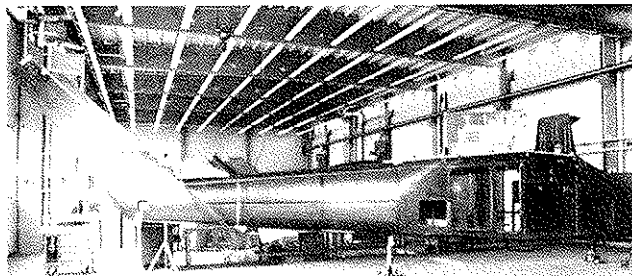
PT1 AIRFRAME ASSEMBLY
